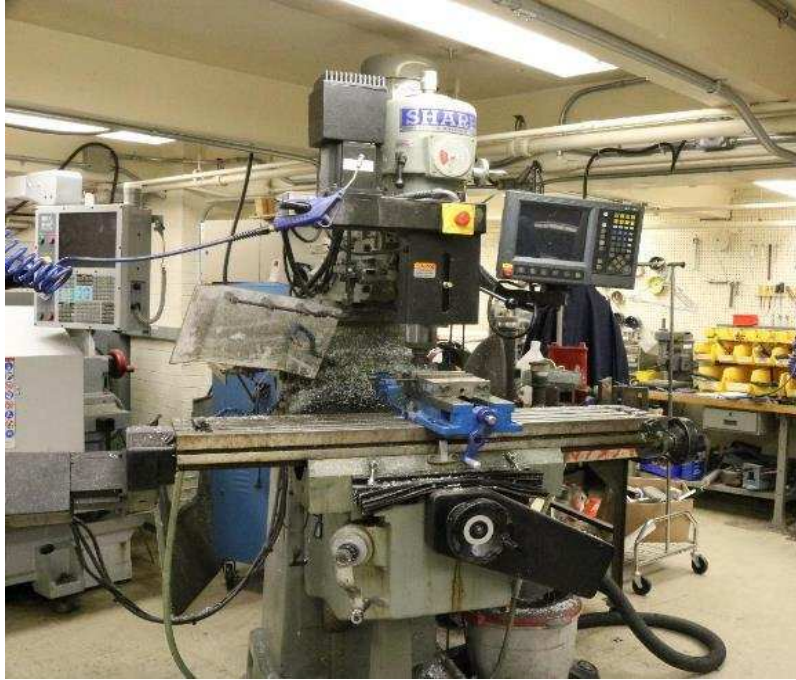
Sharp precision CNC milling machine in the SEAS Machine Shop.
